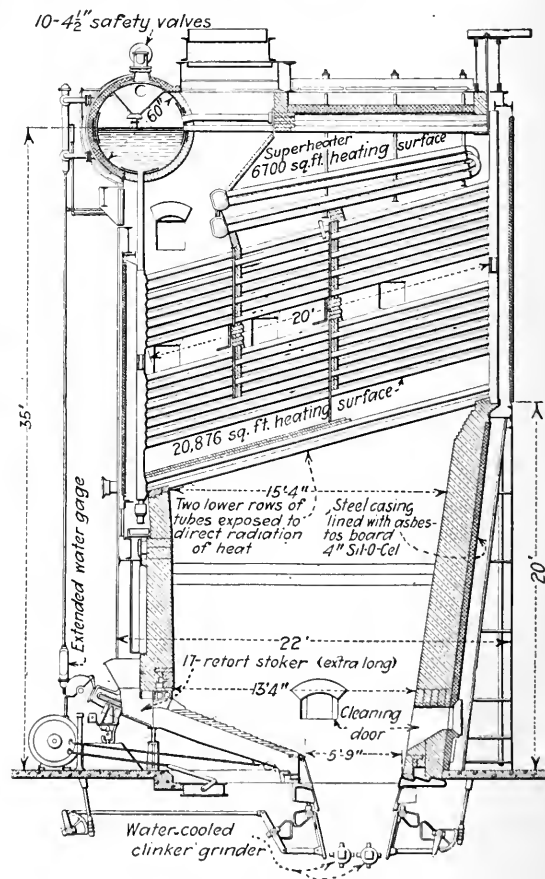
CROSS-SECTION OF BOILER AND SETTING
